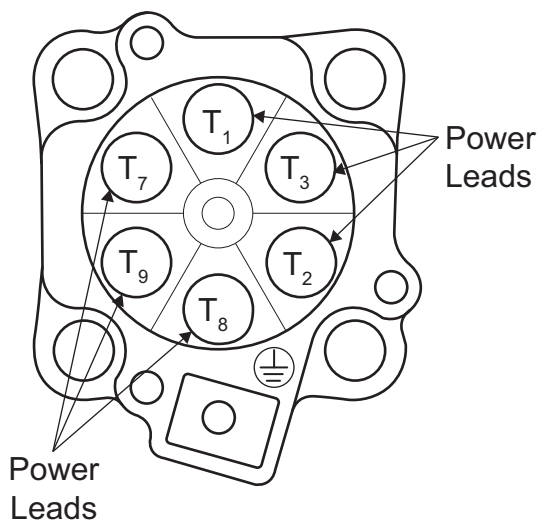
6-Pin Part Wind Terminal Plate Arrangement
